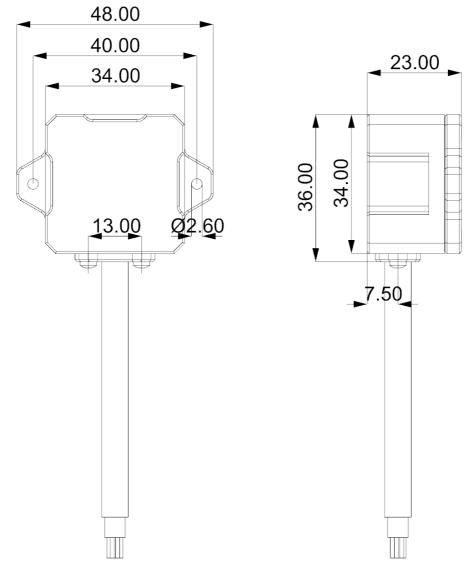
TransducerM TM352/TM353 Mechanical Drawing
